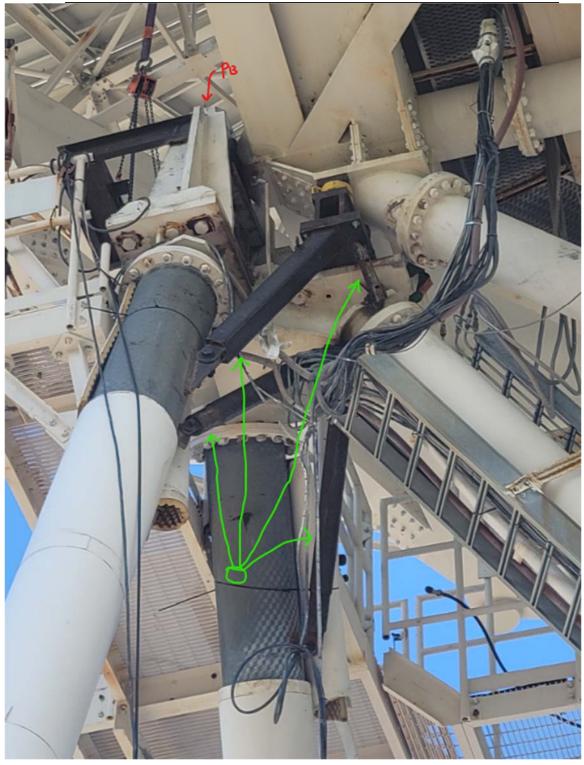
An annotated picture highlighting the pillow block, structural supports, jacks, and bearing puller fully installed.
